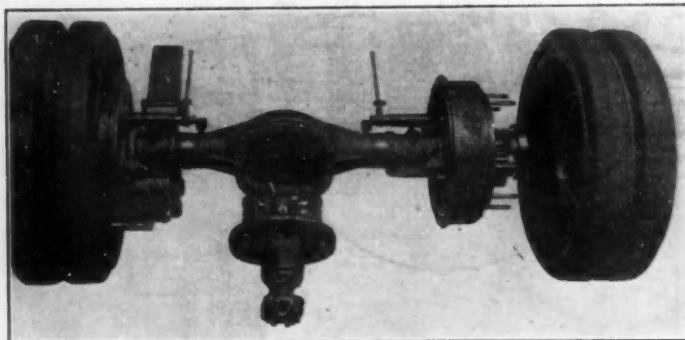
A VIEW OF THE INTERNAL-GEAR DRIVE AXLE, DETAILS OF WHICH ARE SHOWN IN FIG. 21
